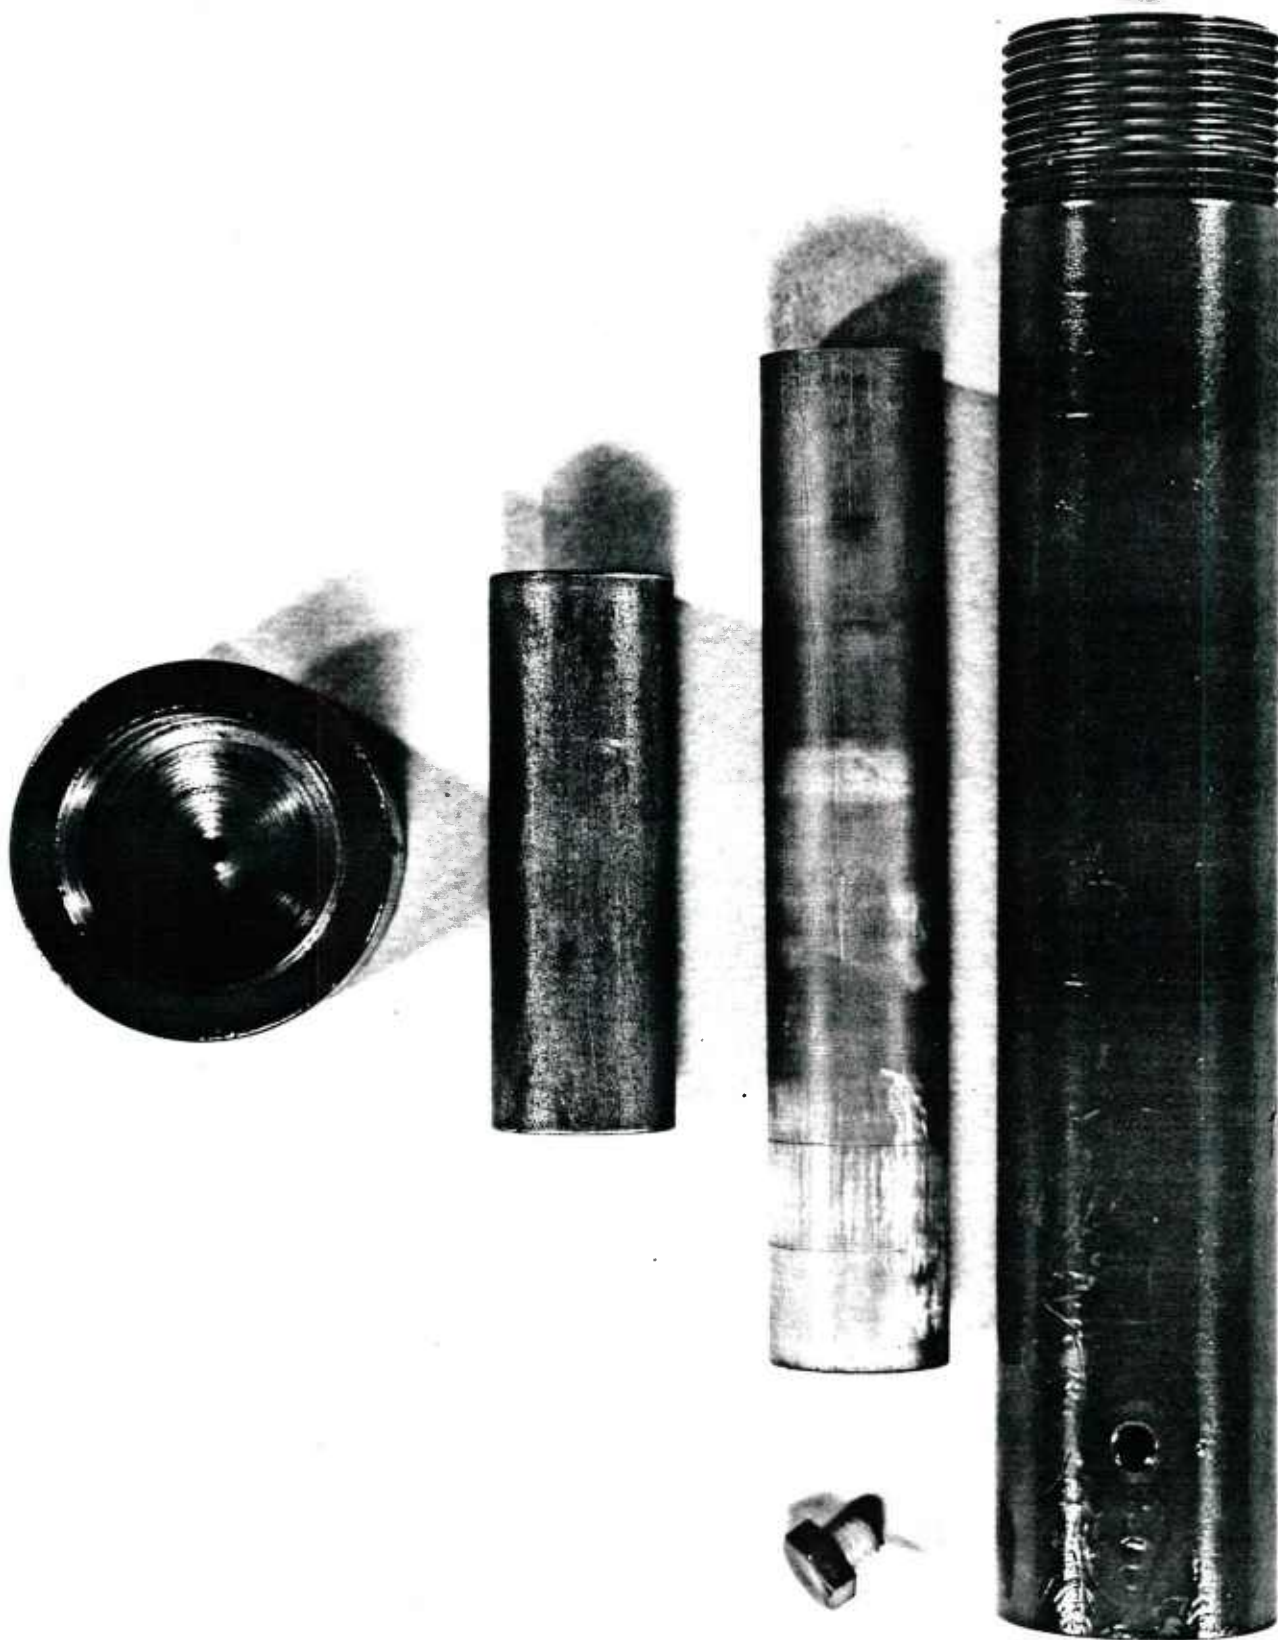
Photograph of exploded view of AMETEK expendable deamer.
